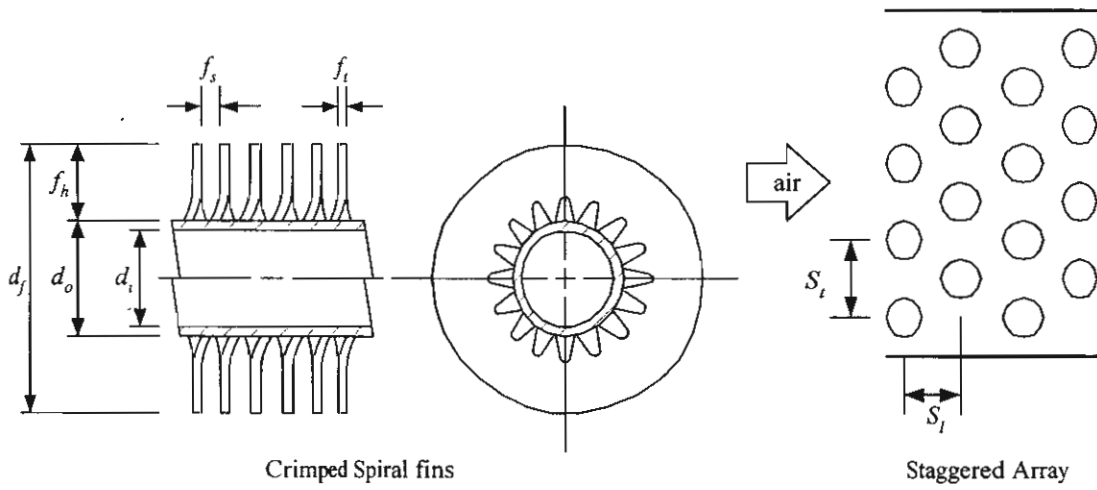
Geometrical sketch of the spiral fin-and-tube and its arrangement.
